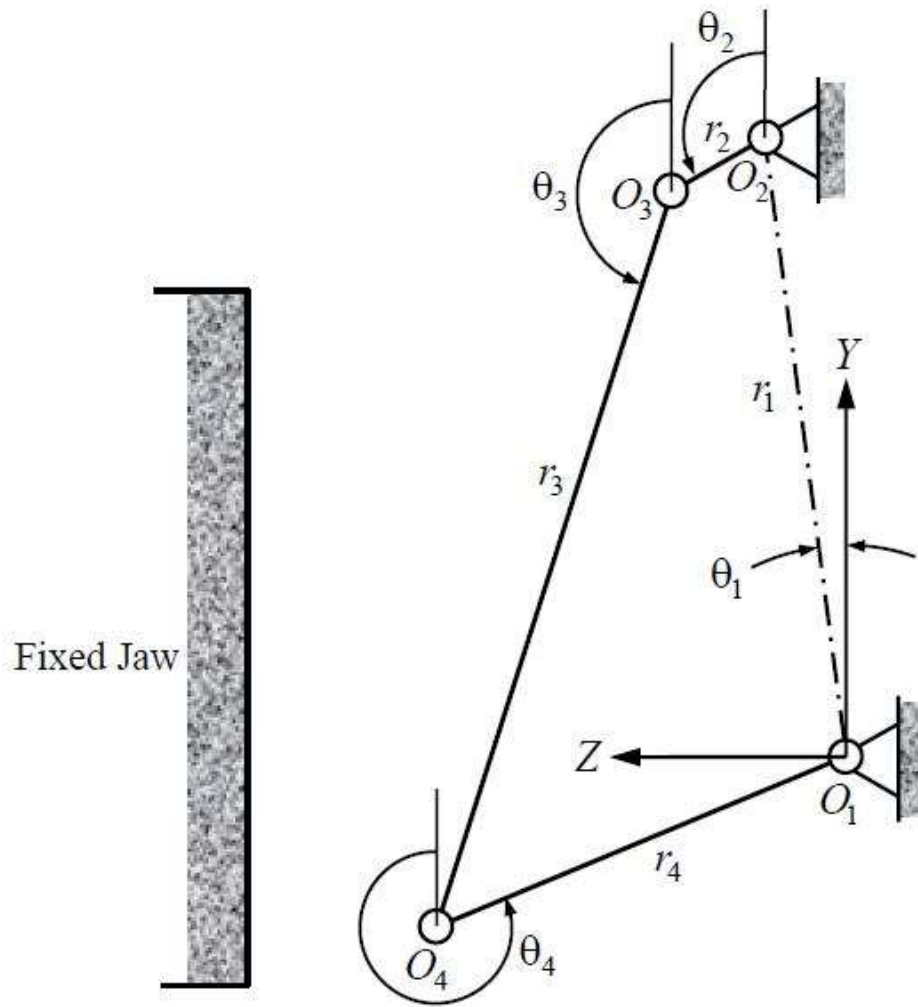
Kinematical Model of the Single Toggle Jaw Crusher
